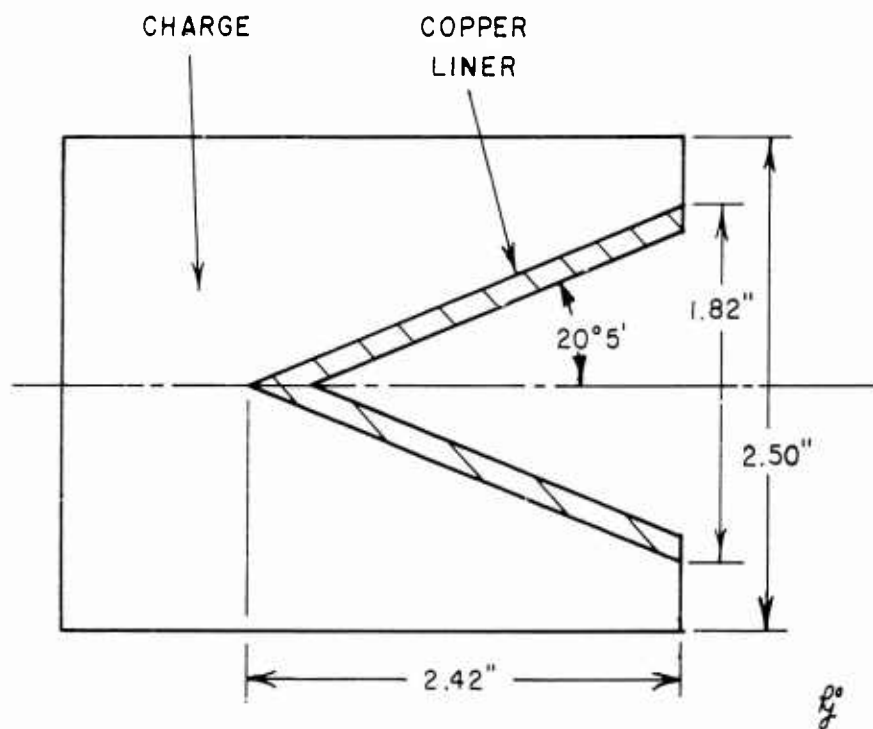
Sectional view of charge and liner used in Test E-17.
